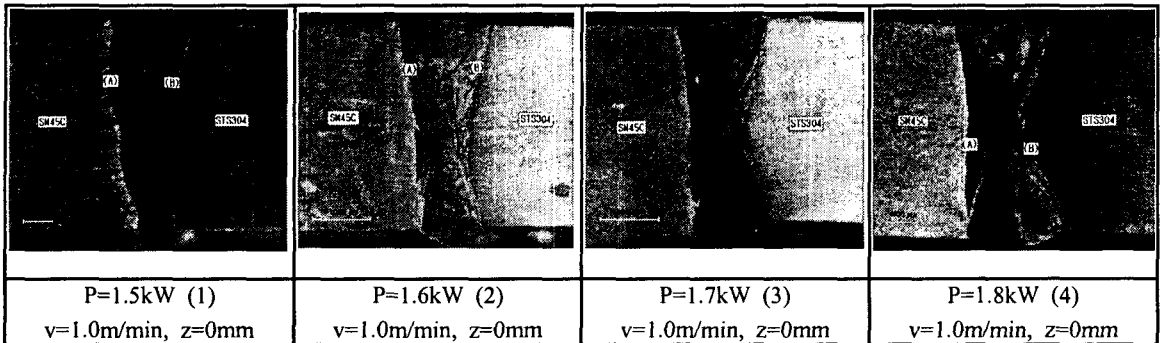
Welding Cross-section of SM45C and STS304 according to the laser beam power
